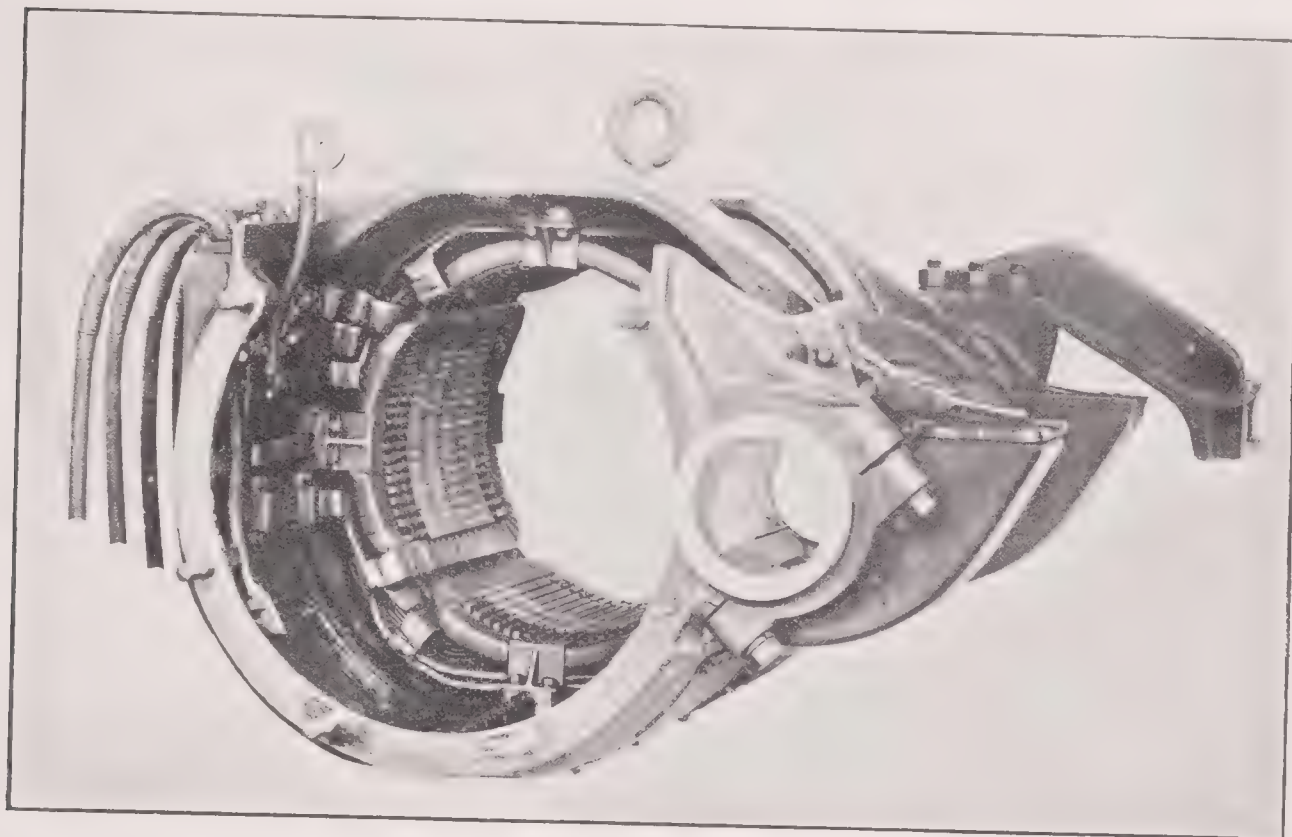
FIELD FRAME OF BRITISH WESTINGHOUSE CO.'S 150 H.-P. SINGLE-PHASE RAILWAY MOTOR WITH BOTH THE NEUTRALISING WINDINGS AND THE MAGNETISING COILS IN PLACE.
